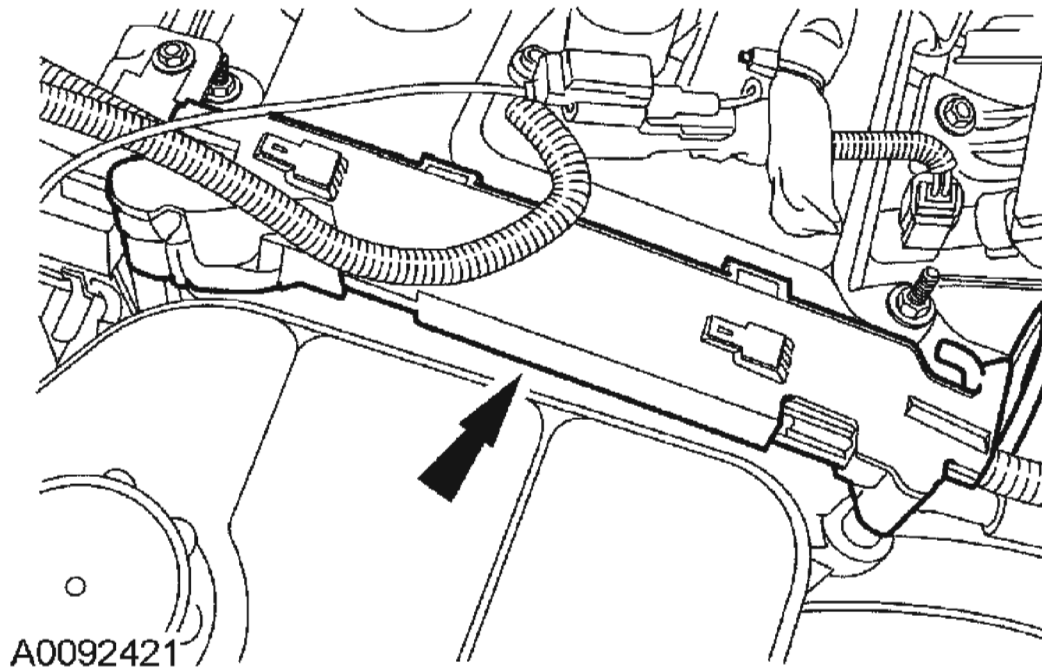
Installing Wiring Harness Retainer On Valve Cover Studs
